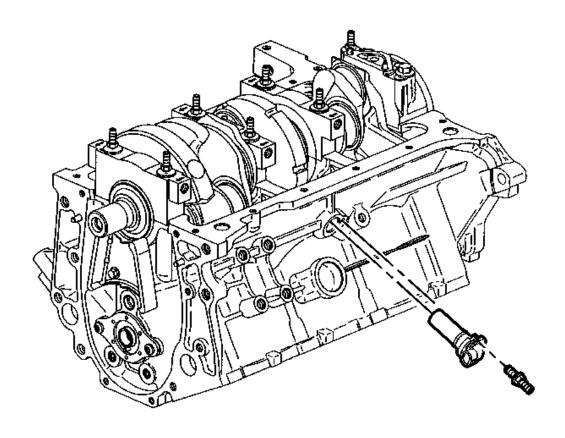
View Of Crankshaft Position Sensor & Stud Courtesy of GENERAL MOTORS CORP.
